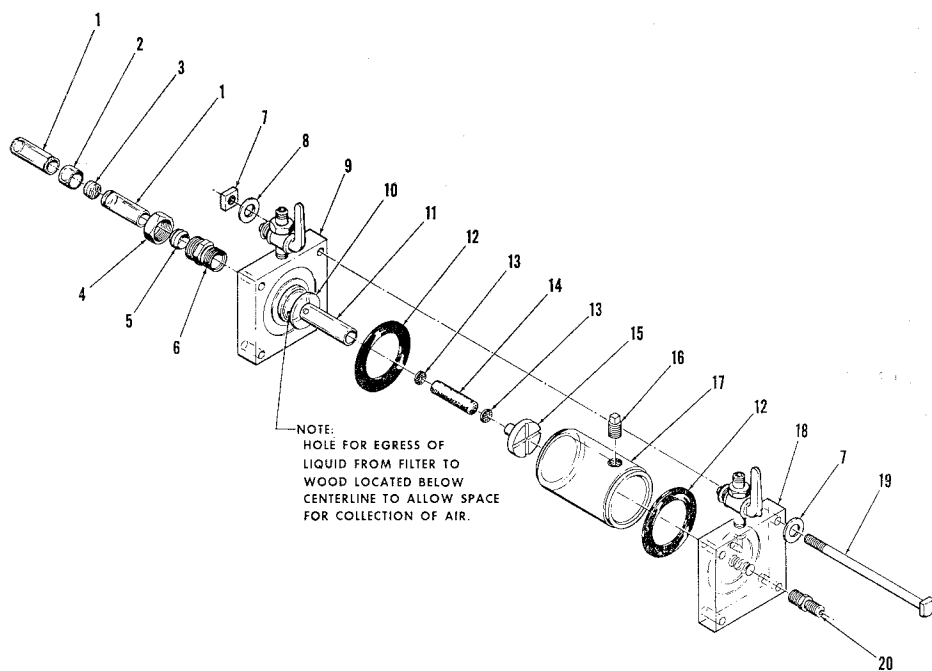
Exploded view showing methods of mounting cotton filter and wood sample. 1: Plexiglas tube sample mount, 1/2 inch OD x 2 inches long. 2: cast epoxy seal. 3: wood sample. 4, 5, 6: compression fitting, 1/2 inch OD to 3/8 inch NPT. 7, 8, 19: 1/4-inch nut, washer, and bolt. 9: downstream block. 10: air collection chamber. 11: filter holder. 12: rubber gasket. 13: 80-mesh screen support. 14: cotton filter. 15: filter-retaining plunger. 16: 1/8-inch NPT drain plug. 17: cell cylinder. 18: upstream block. 20: adapter, 1/4-inch OD flare to 1/8 inch NPT.
